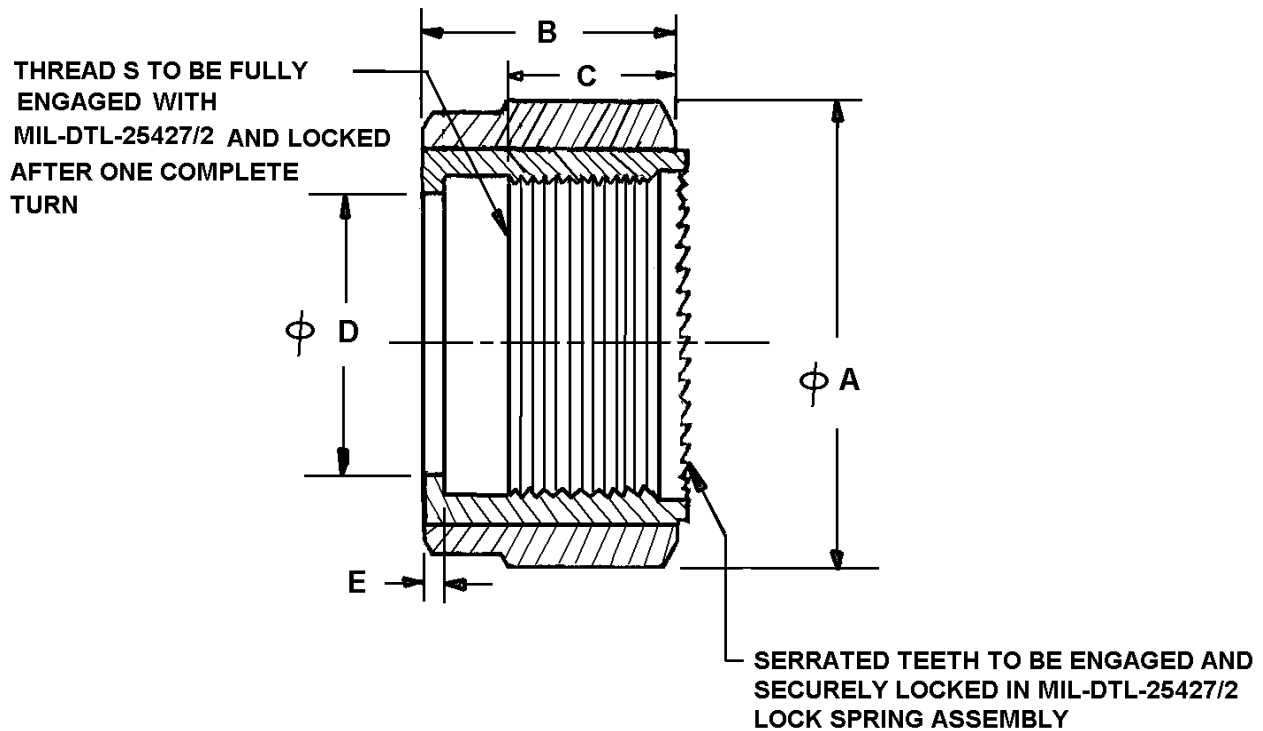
Coupling nut, dimensions and configuration for type I and II.
